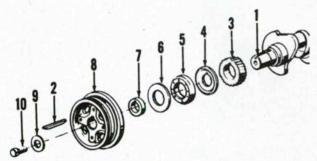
View showing crankshaft gear, front oil seal and crankshaft pulley. Dust seal (6) and oil seal (5) are pressed into timing gear cover and ride on spacer (7).
